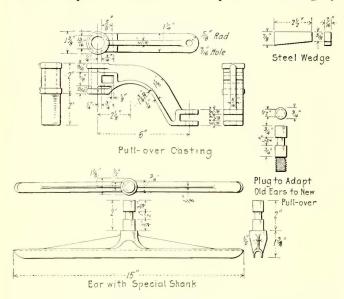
DETAILS OF THREADLESS PULL-OVER CASTING AND EAR WITH SPECIAL SHANK
